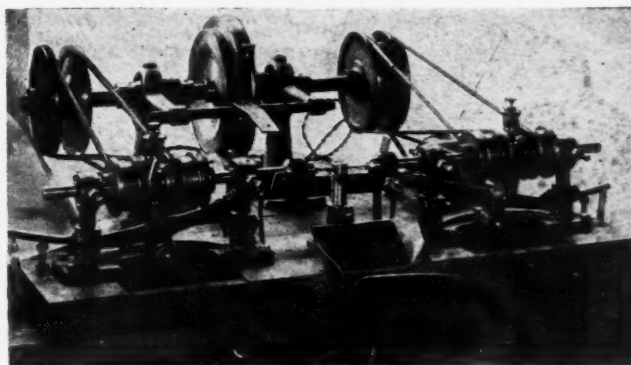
Bench-type of double-spindle drilling and tapping machine
